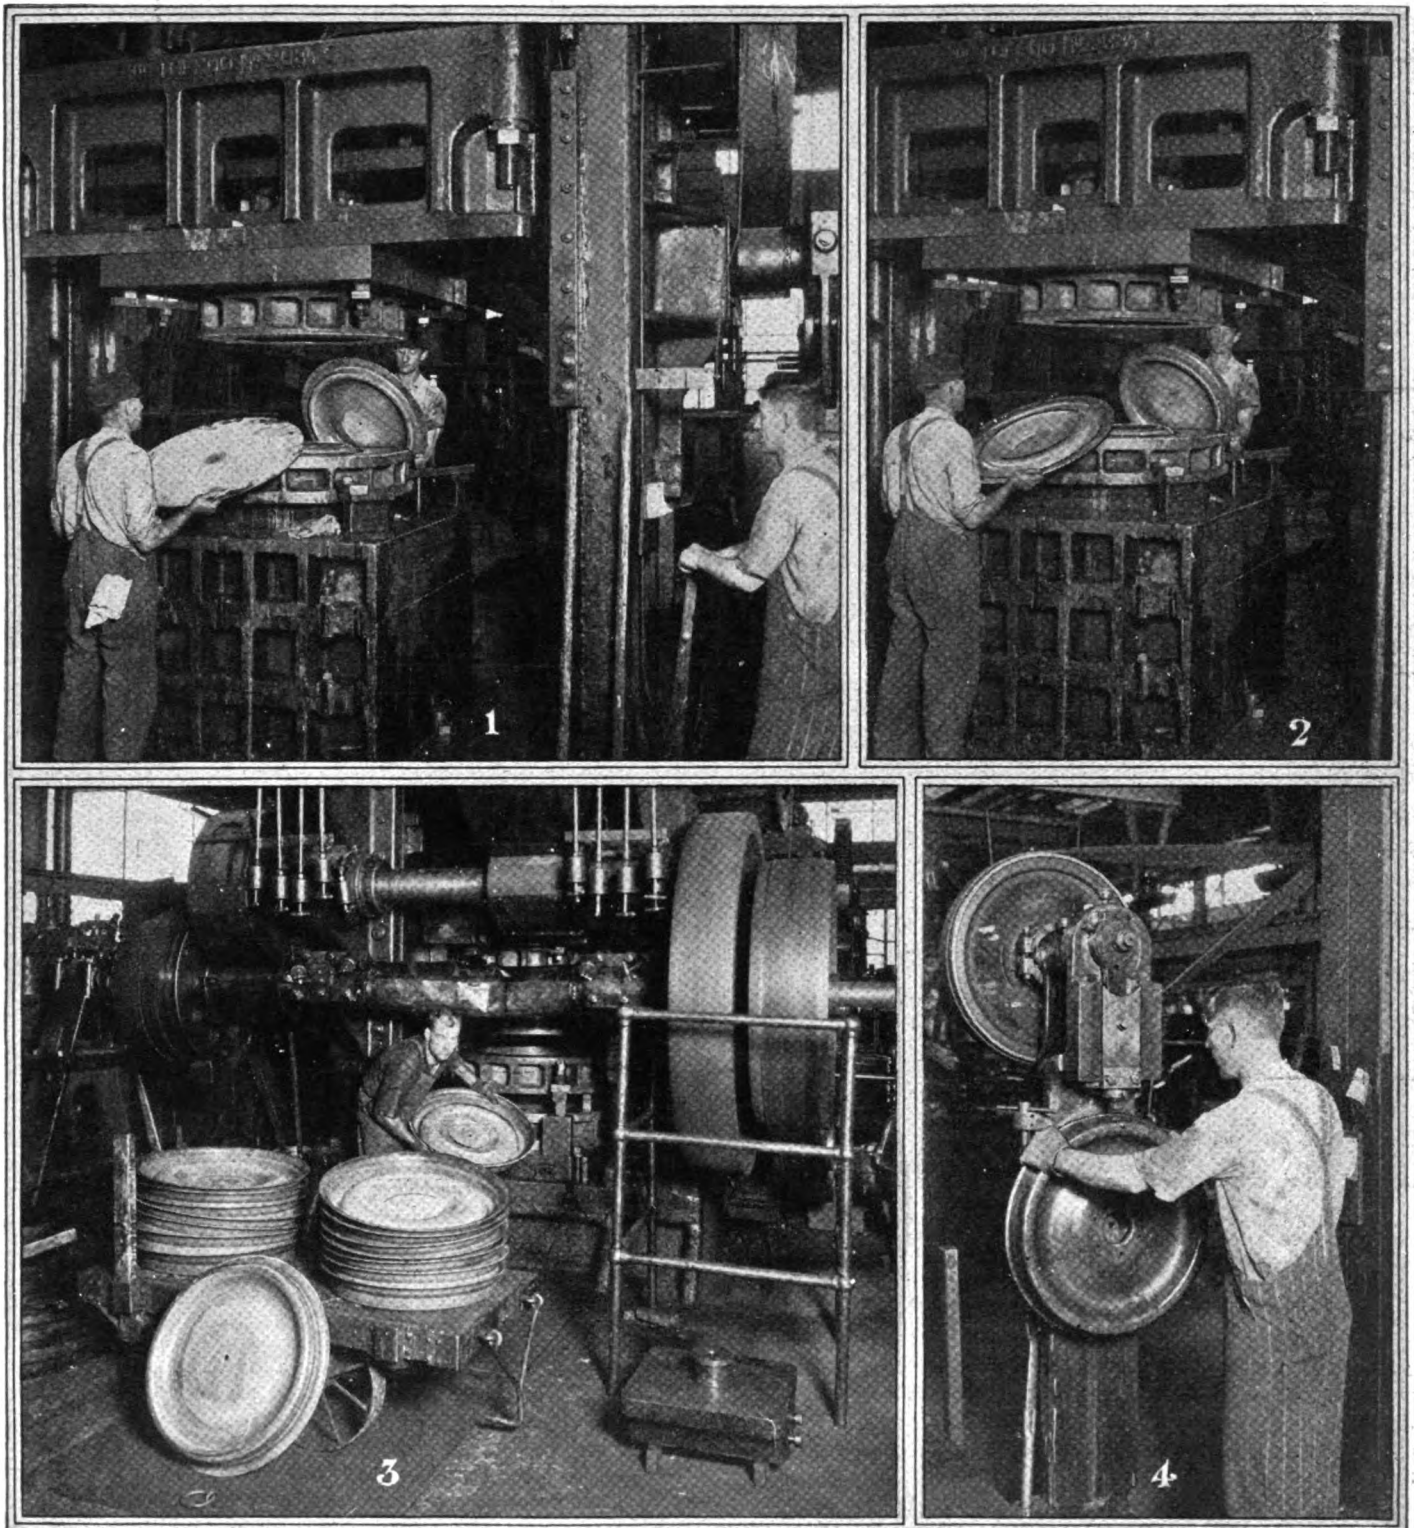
For this operation on a blank disk a 268½ Toledo toggle press with a capacity of 410 tons is used. Fig. 2—The same press equipment is used for this operation as in the first. Fig. 3—Forming and flattening disk. For this operation a No. 80½ Bliss press is used. The capacity of this press is 1091 tons. In this operation the disk is given its final shape, after which it is ready for center draw, punching for rim bolts, air valve stem hole and driving lugs. Fig. 4—When piercing rim bolts in the disk the bolt is extended through the felloe band and is held in place by demountable clips. The design on the bolt is such that when the nut is tightened on the clamping ring the bolt is drawn in place and forms a component part of the felloe band itself.
